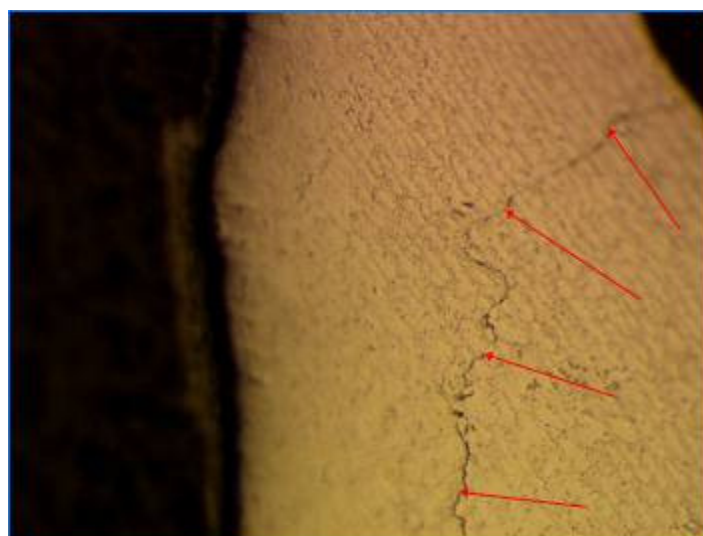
cross section, SN63, U52, right pad solder crack, 200xb
